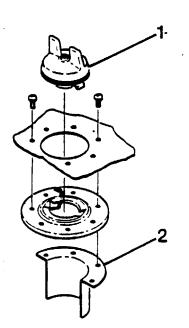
Fuel Bay Installation (Sheet 5 of 5)
